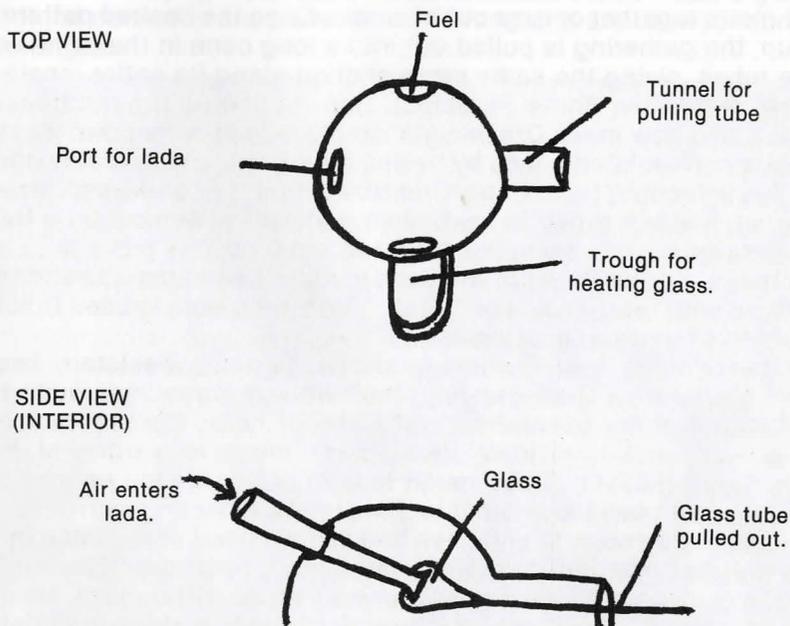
PAPANAIDUPET Schematic drawing of the furnace used to draw tubes.
